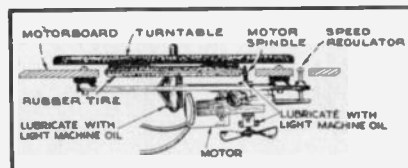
RCA Victrola Model U-9 motor-turntable assembly.
